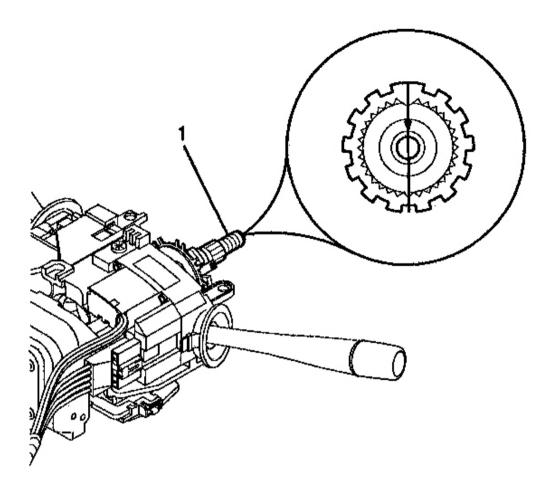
Block Tooth Of The Steering Shaft Assembly In The 12 O'clock Position Courtesy of GENERAL MOTORS CORP.
